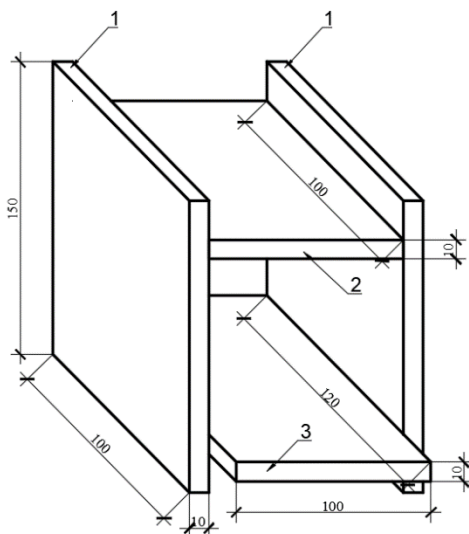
Schematic drawing of the stand for the experiment. Board dimensions:
